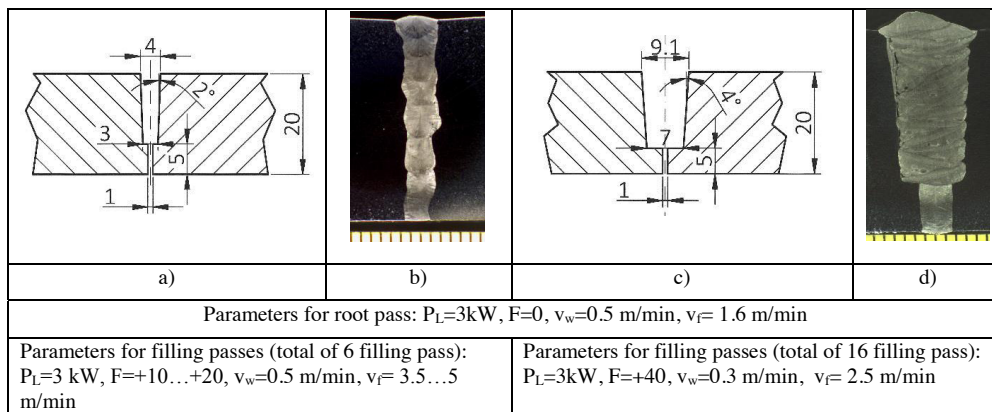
Groove geometries used in cold filler wire multi pass tests and corresponding weld macro cross-sections.
